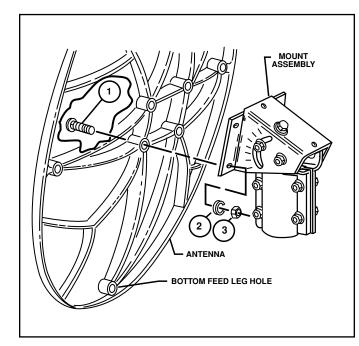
ASSEMBLING REFLECTOR TO AZ/EL CAP MOUNT
